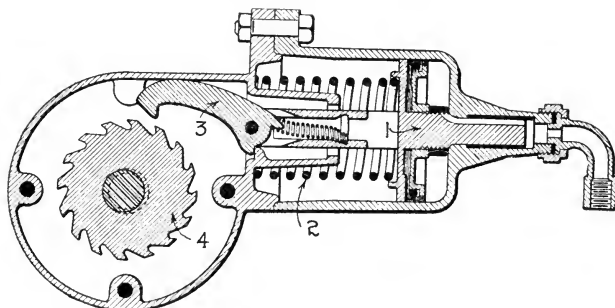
Part Sectional View of Automatic Slack-Adjuster.
